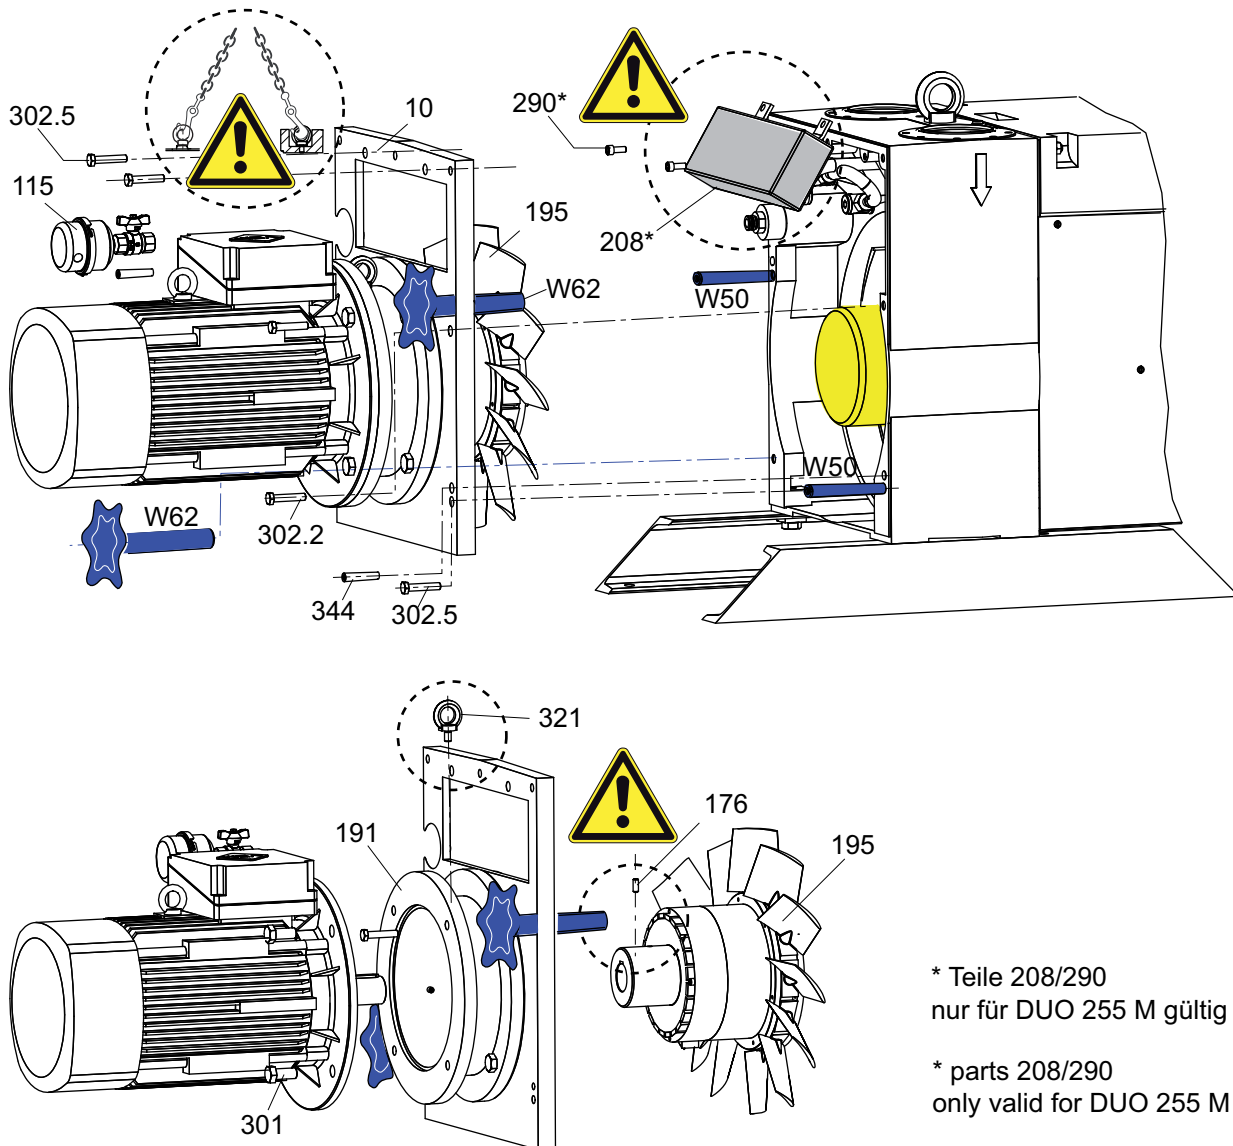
Dismantling/assembling the drive motor at pumps with magnetic coupling
